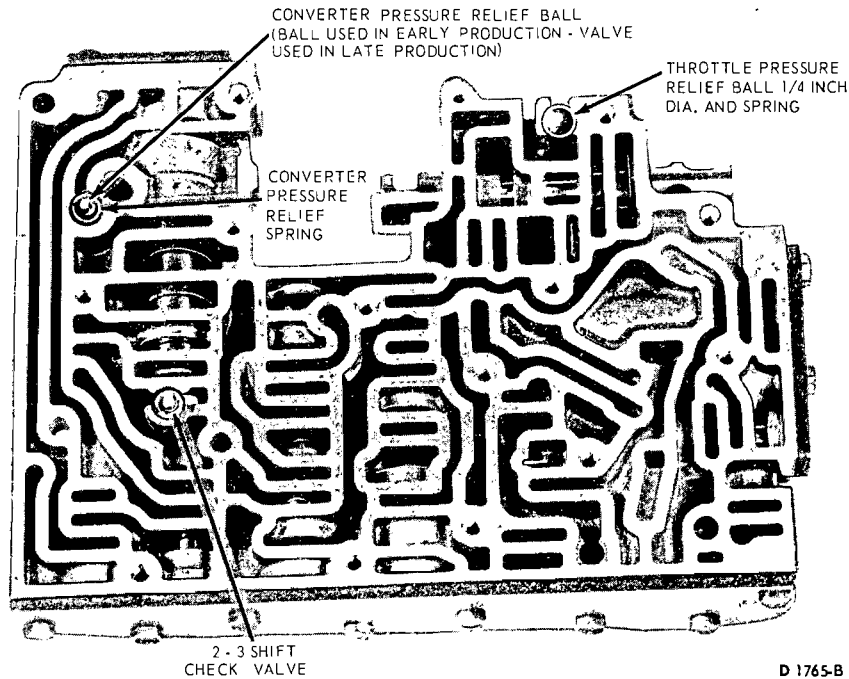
Converter Pressure Relief Valve, Throttle Pressure Relief Valve, and 2-3 Shift Check Valve Locations
